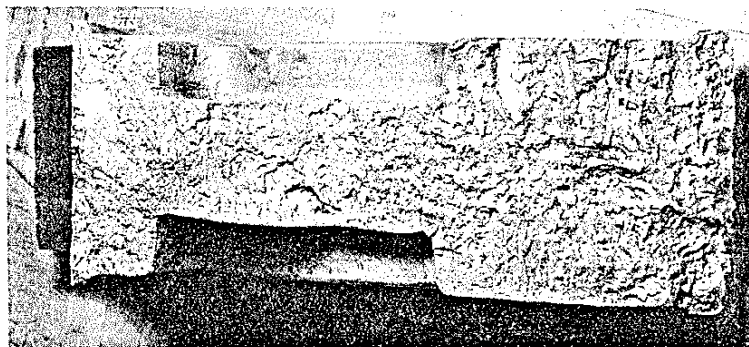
Fracture Face of Part Shown in Fig. 17. Failure initiated at top left in dendritic pattern probably due to mistake in steel-making with low carbon content. Brittle fracture accompanied low Charpy impact properties.
